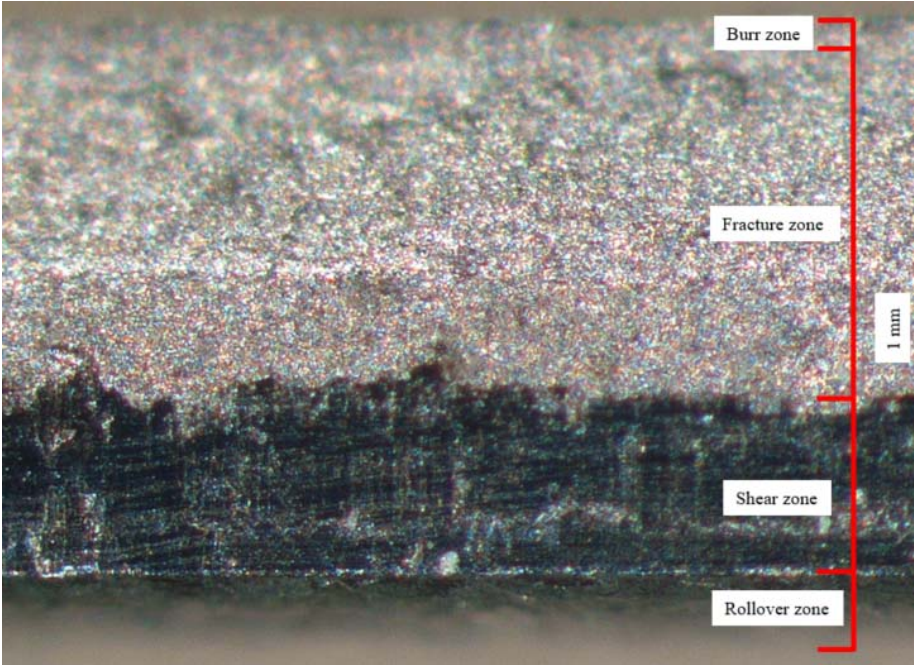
The medium cut edge of 1 mm DP600GI specimen from Supplier A.
